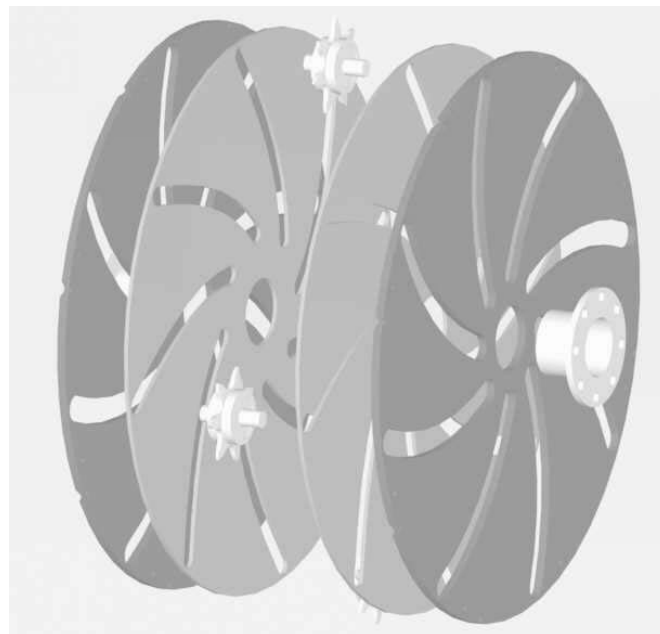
Exploded View of the Slotted-Plate CVT prototype
